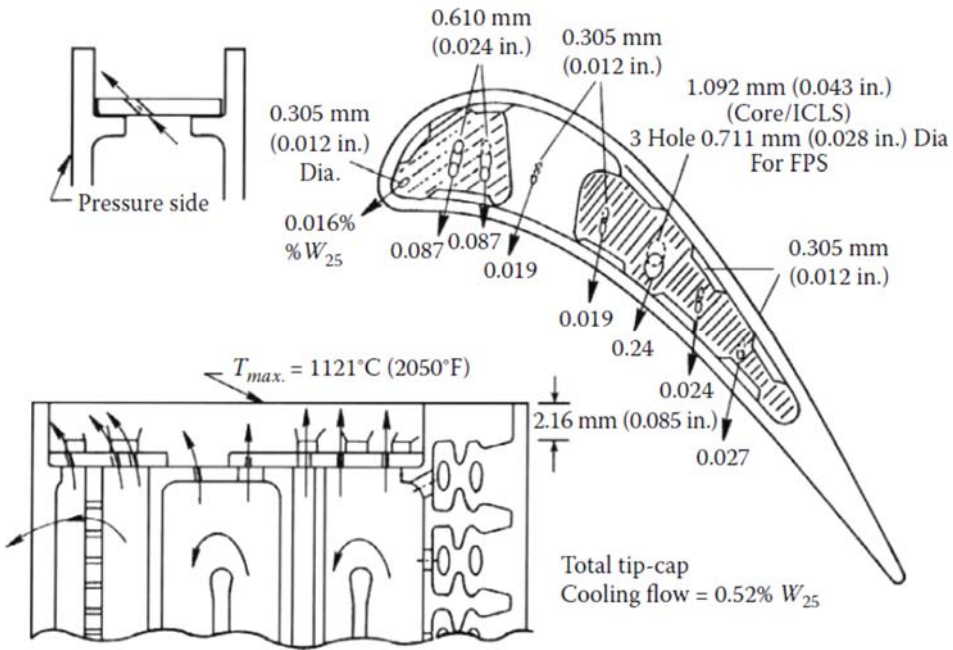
First stage rotor blade-tip-cap cooling design- [9].
